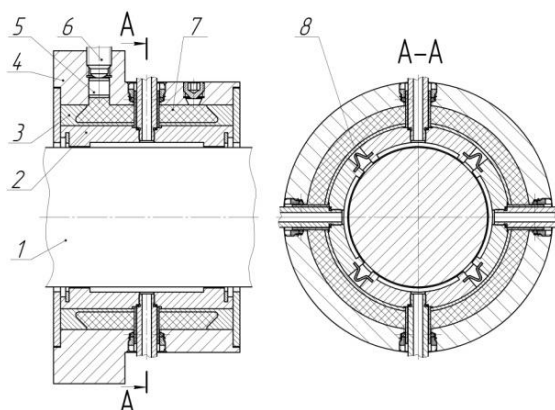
Adjustable hydrostatic bearing 1 – spindle; 2 – segment; 3 – elastic sleeve; 4 – housing; 5 – plunger; 6 – screw; 7 – hydro-plastic; 8 – springs
